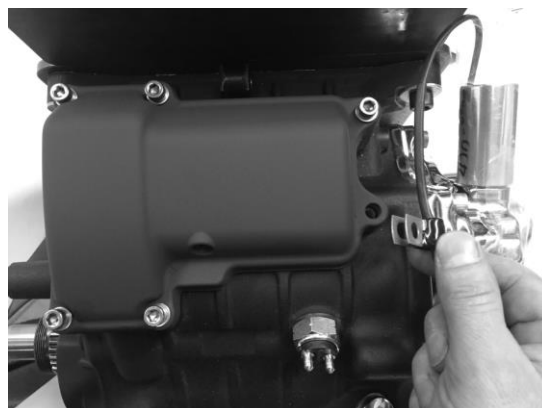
| SOLENOID WIRING CLAMP TO THE RIGHT REAR TOP COVER BOLT
